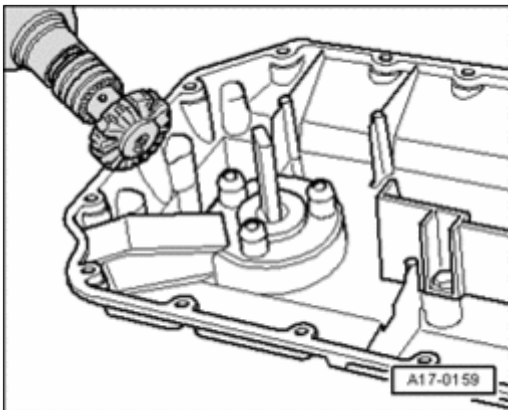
Using Rotating Plastic Brush To Remove Any Remaining Sealant From Oil Pan (Lower Part) And At Upper Part
